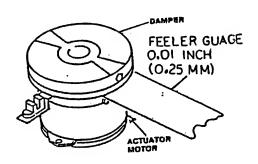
DAMPER ASSEMBLY Replacement Procedure
